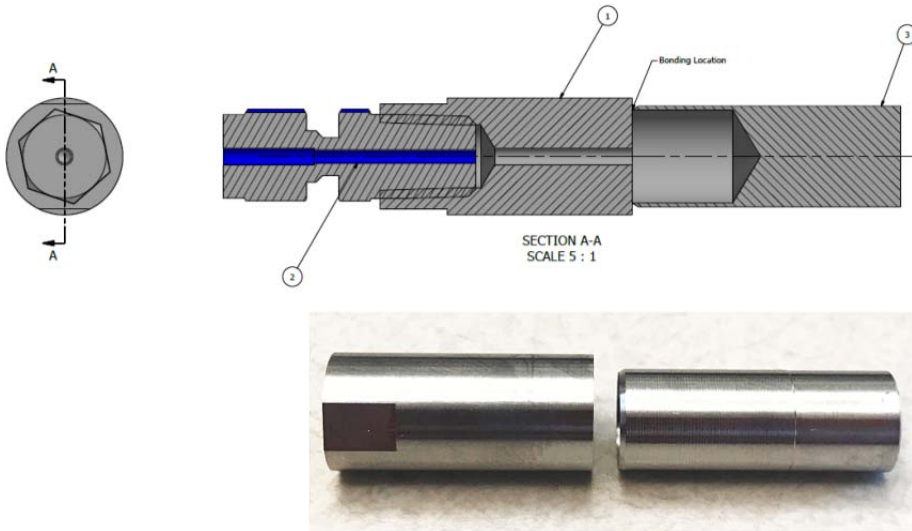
Schematic of the surrogate endplug (1) and thin-wall cladding (3) for PRW. The adapter (2) is for hydraulic pressure burst testing of the endplug-cladding weldment.
